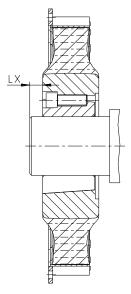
Mounting position of taper clamping sleeve to the shaft end
